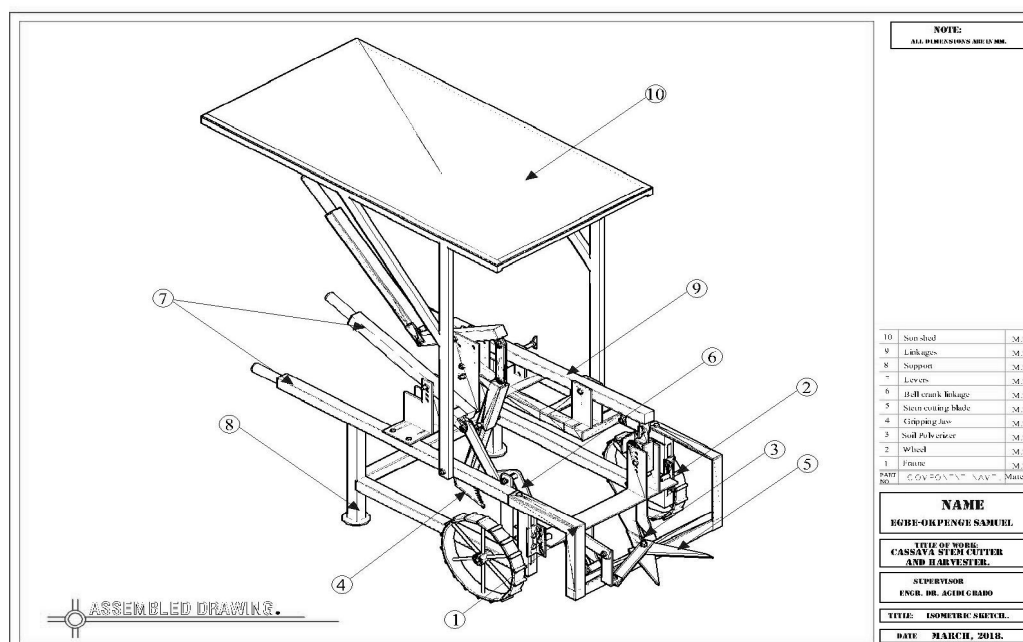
Assembly Drawing of the Developed Push-Type Cassava Harvester
